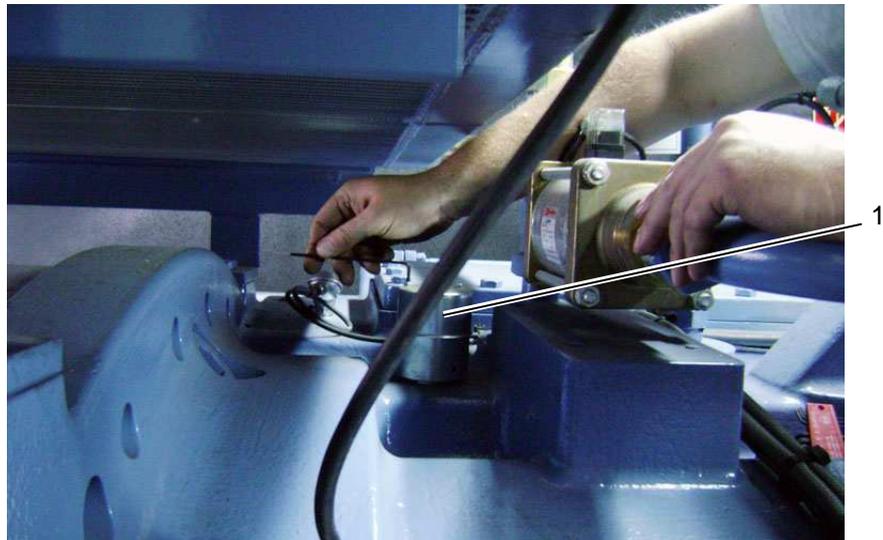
1 Inspecting the ventilation filter (example: manufacturer Winergy)
